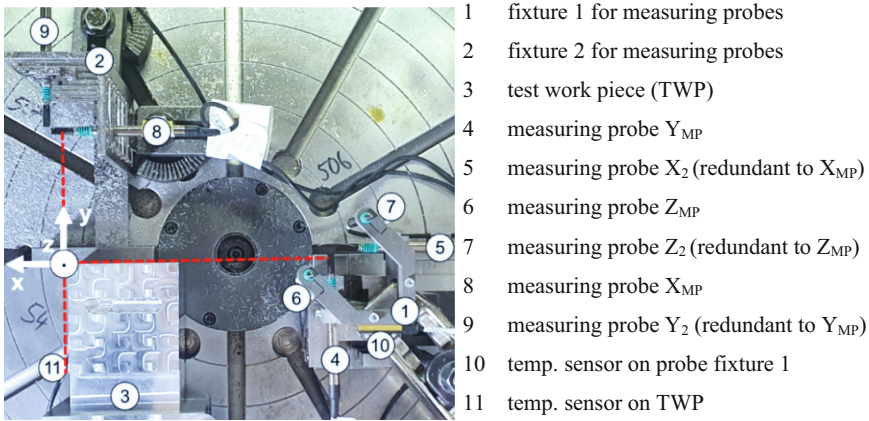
Experiment setup on machine tool table: sensor positions and coordinate system.
